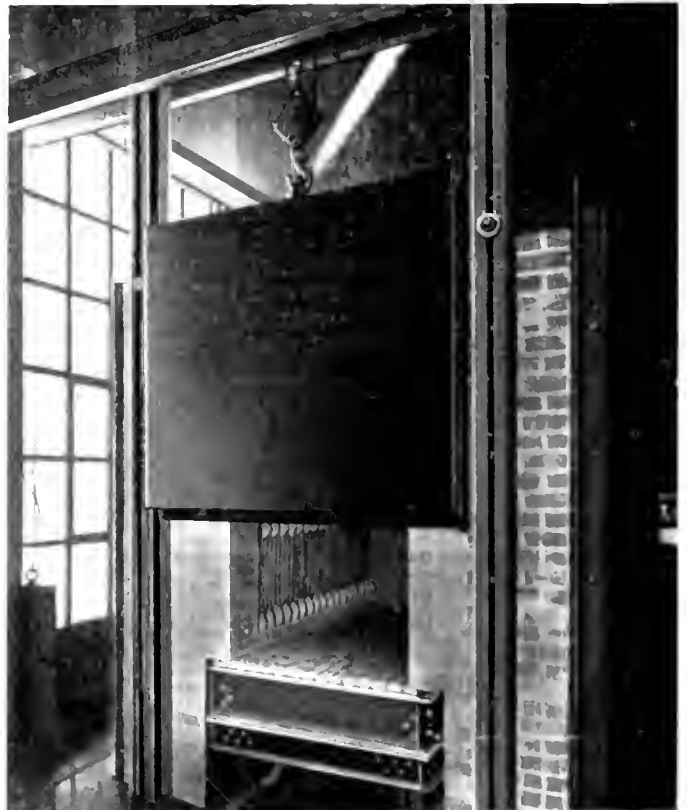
Car Bottom Furnace for Annealing Steel Castings
